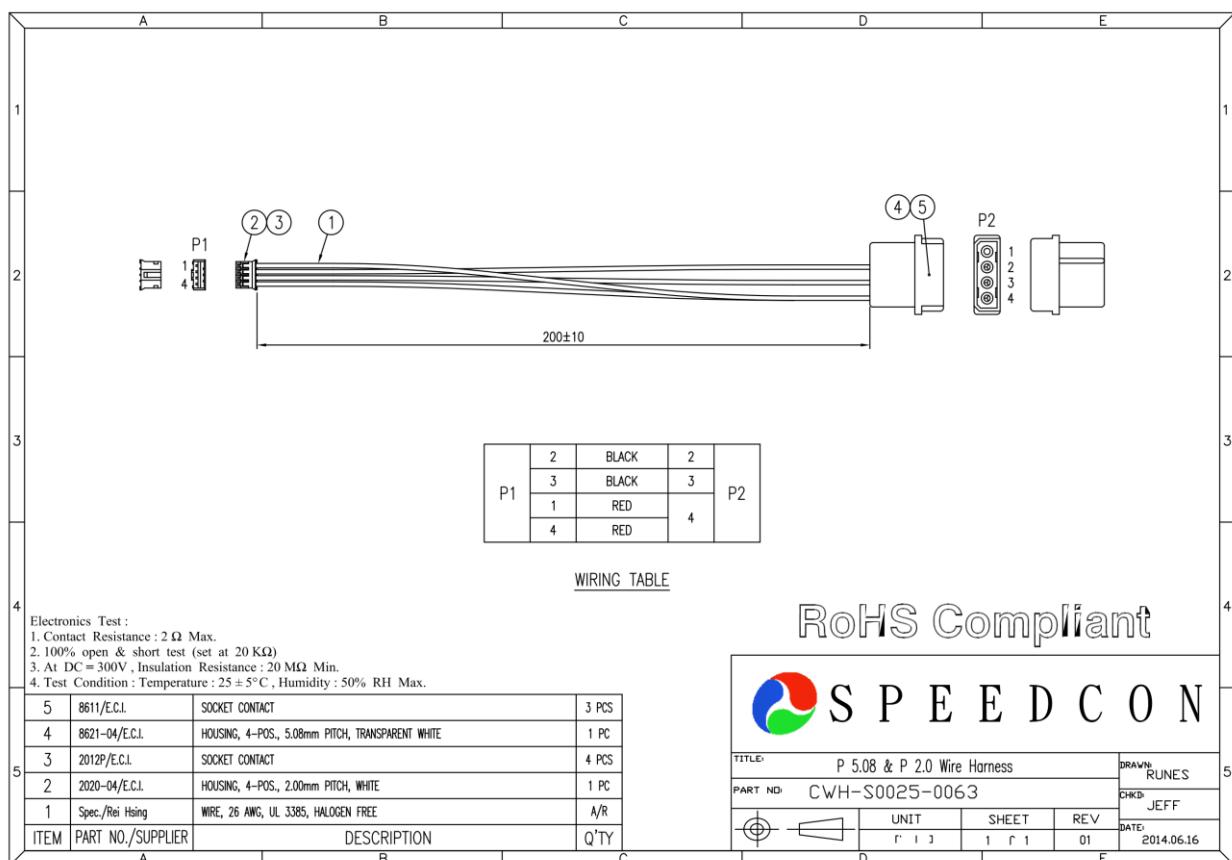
4 Pin Header Pitch 2.0 Power Cable Drawing
